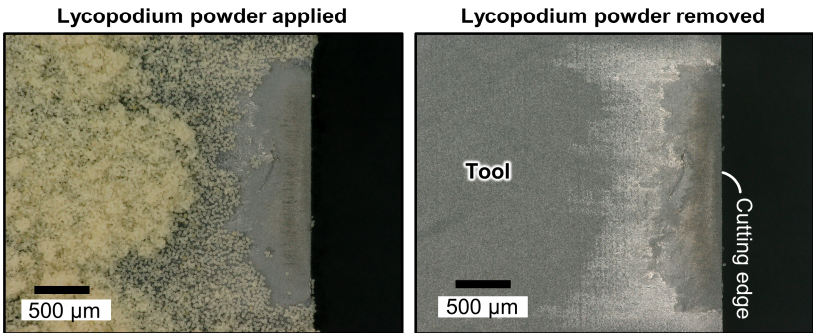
Observation of lubricant penetration within the tool-chip contact on the rake face using Lycopodium powder, performed ex-situ.
